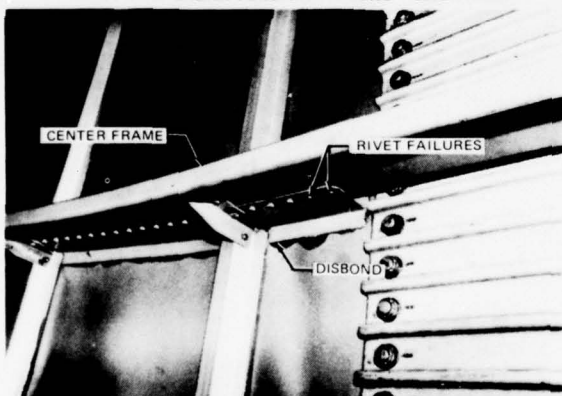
SHEAR-TENSION RIVET FAILURE
